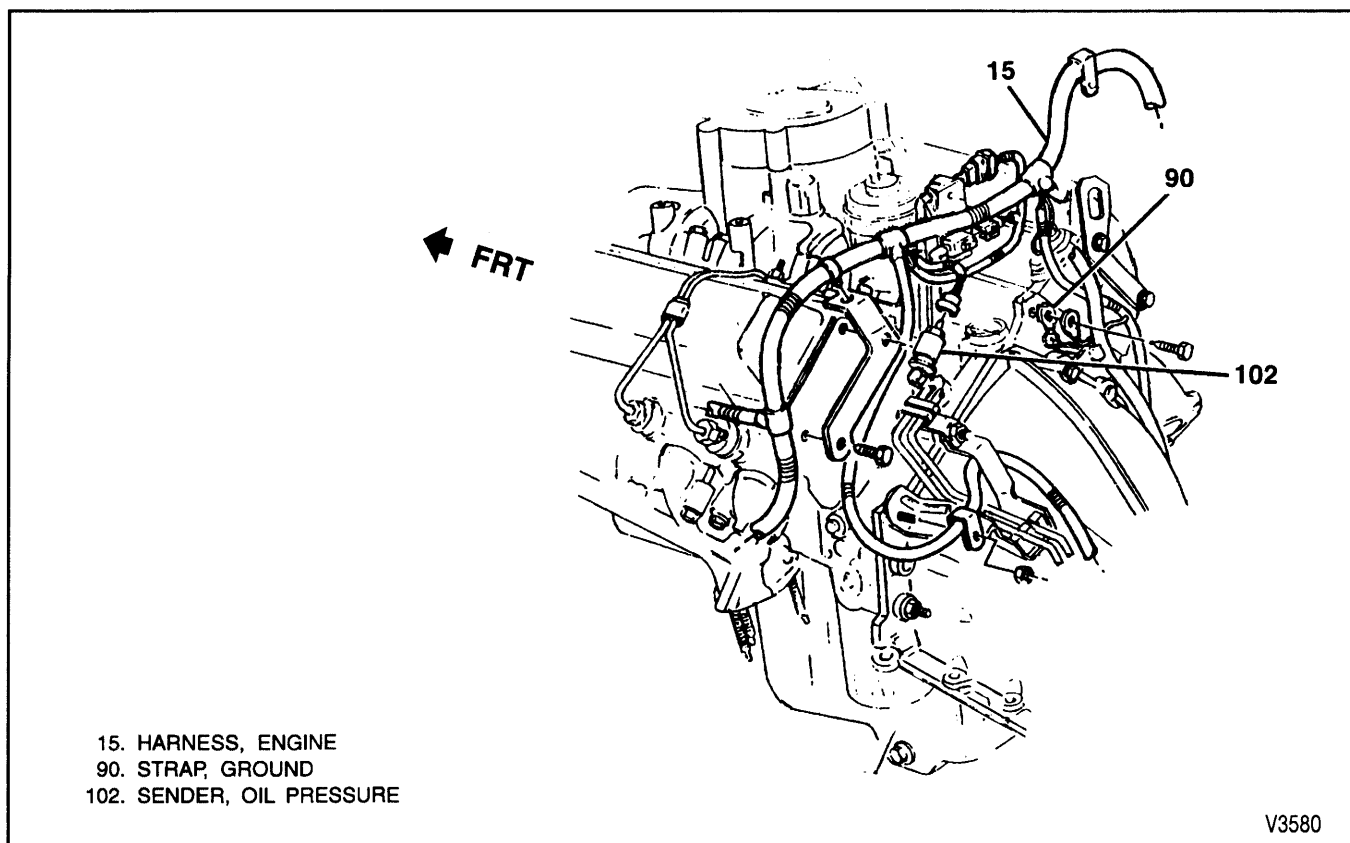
Engine Wiring - Rear (6.5L Diesel)
